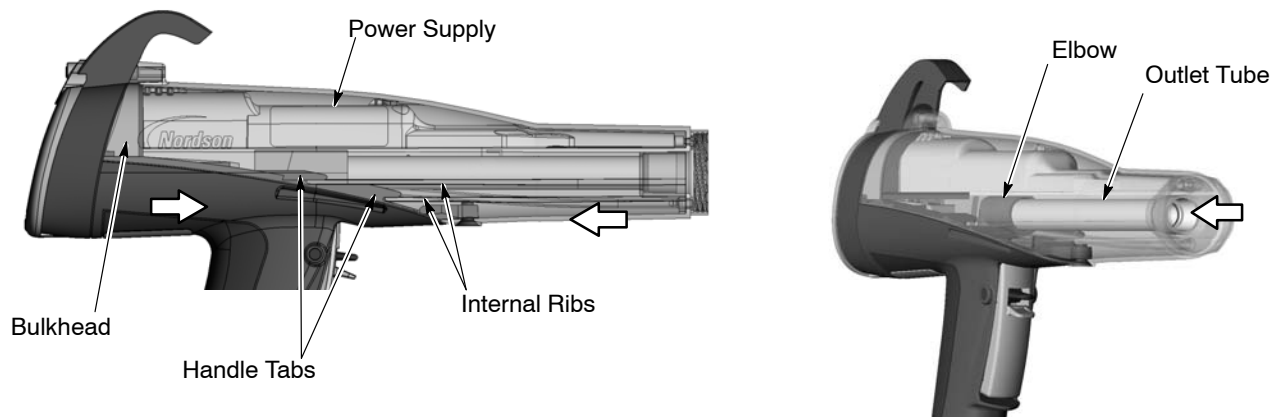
Mating the Gun Body with the Handle and Connecting the Outlet Tube to the Elbow
